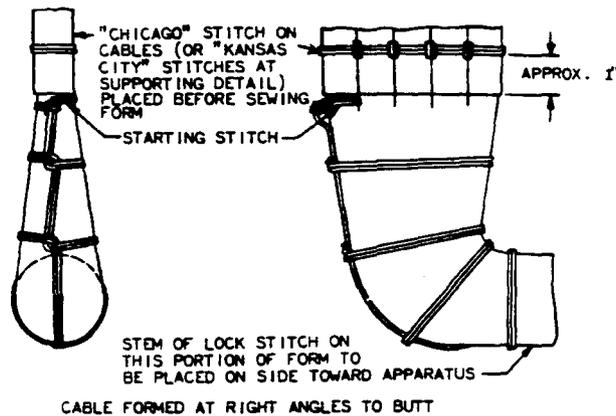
SINGLE LEG CABLE FORM AT RIGHT ANGLES TO BUTT SEWED WITH LOCK AND WINDING STITCHES. (PARS. 2.32, 2.33, 3.23)
